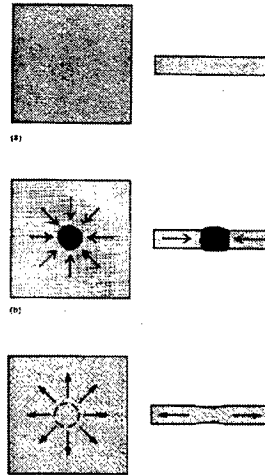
Thermal residual stresses caused by spot welding. (a) Square plate under uniform pressure. (b) When heavily loaded, welds are under tensile stresses and base metal is under compressive stresses. (c) When heavily loaded, welds are under compressive stresses and base metal is under tensile stresses.
